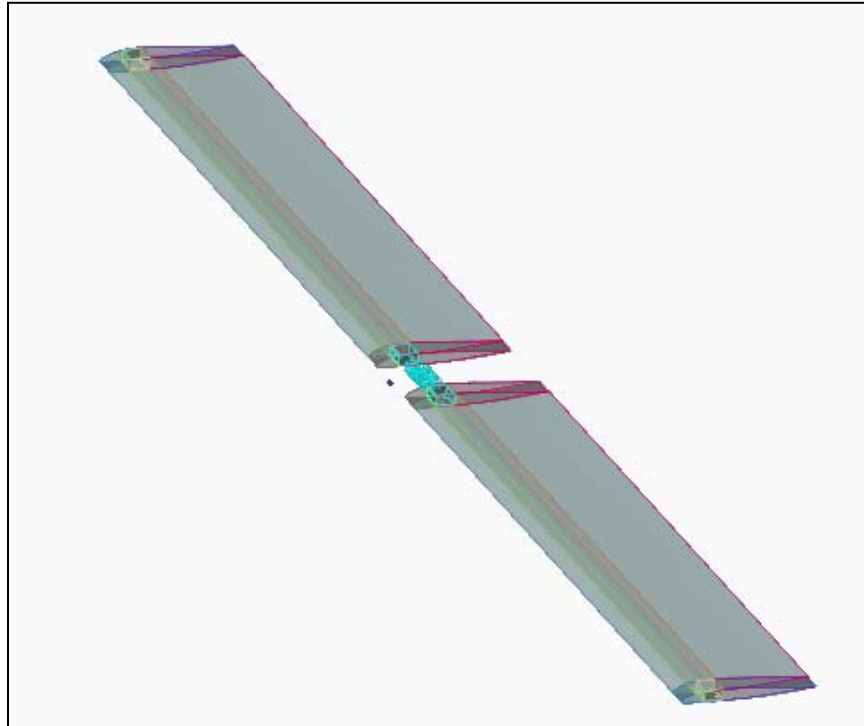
CAD model of 2 wing section and joiner block (separated apart)
